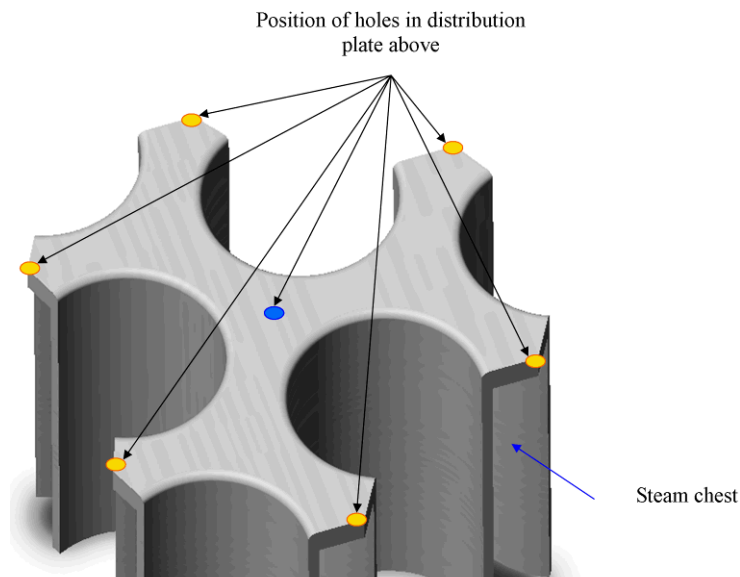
Tube sheet surrounding a single hole (3 hole design)
